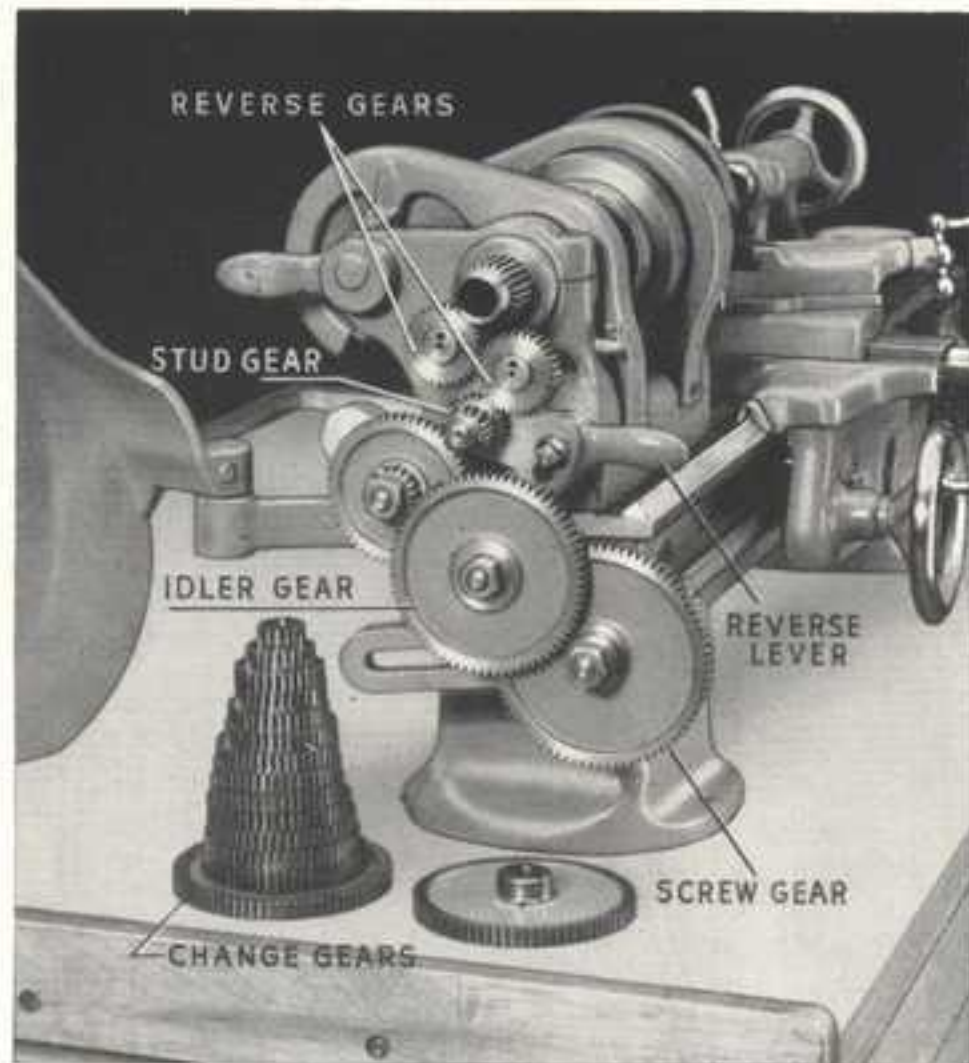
Standard Change Gear Lathe Set Up for Cutting Screw Threads
